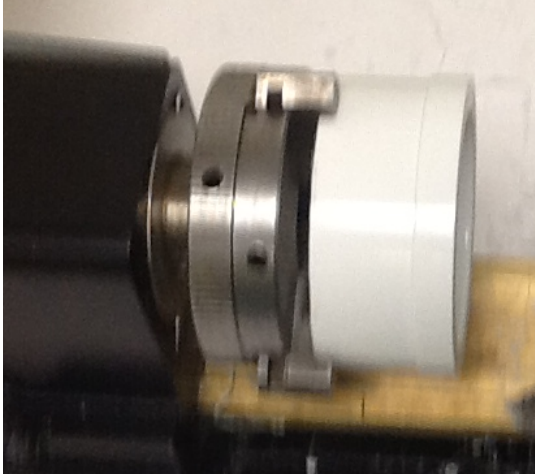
Chamber connector fabrication step 2. Both ends of the adapter were squared on the lathe.
